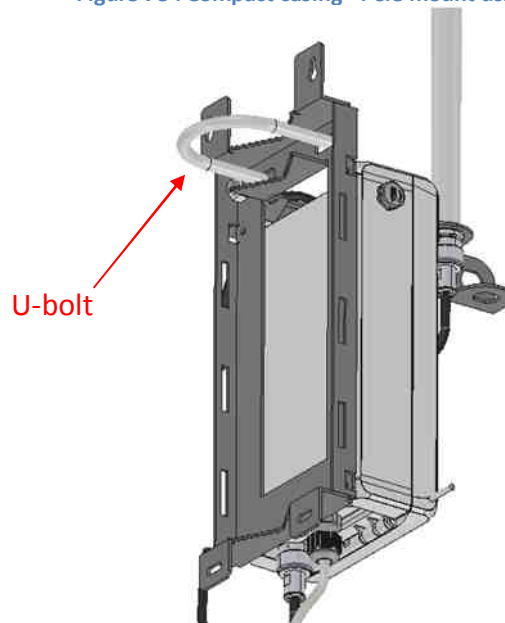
Compact casing - rear view of the pole mounting using U-bolt (no pole represented)
